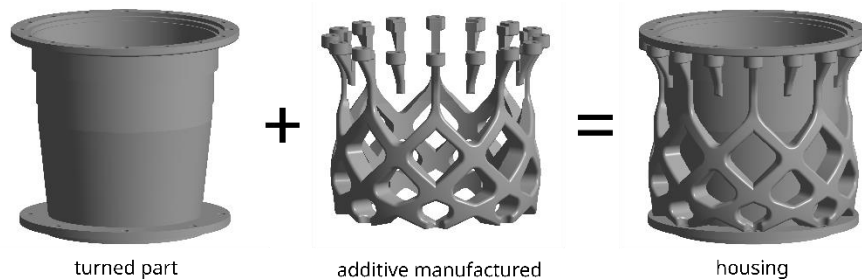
Manufacturing concept combining turned part and additive manufactured structure.
